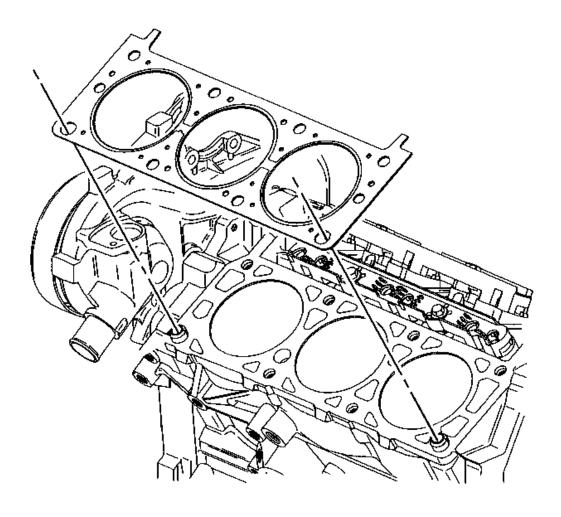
Removing Left Cylinder Head Gasket Courtesy of GENERAL MOTORS CORP.
